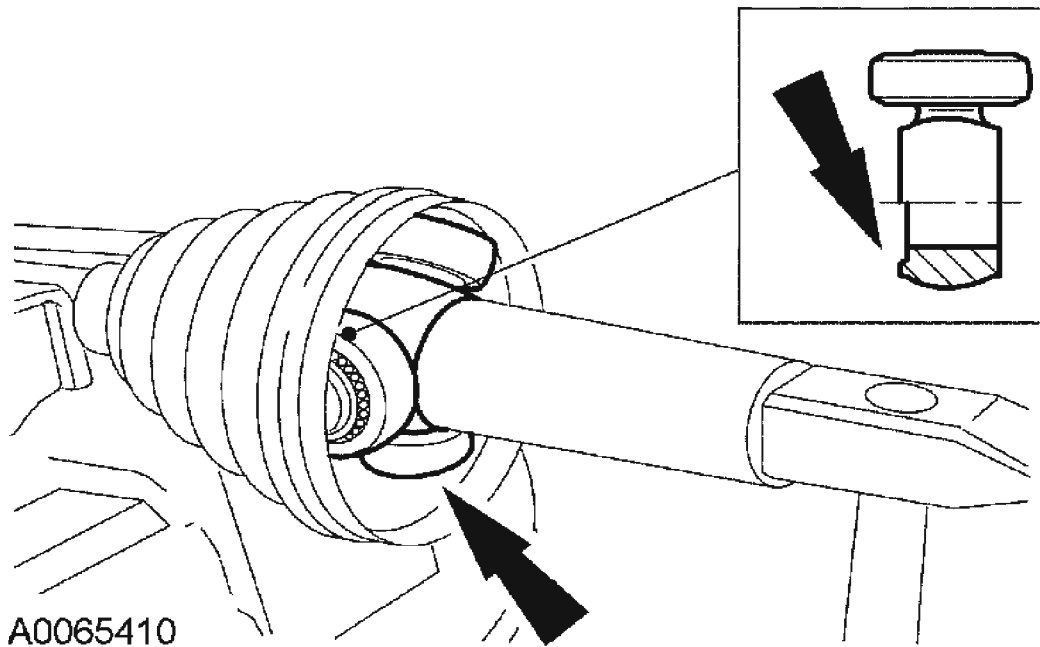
Using Special Tool To Push Tripod Onto Front Drive Halfshaft As Far As It Will Go
